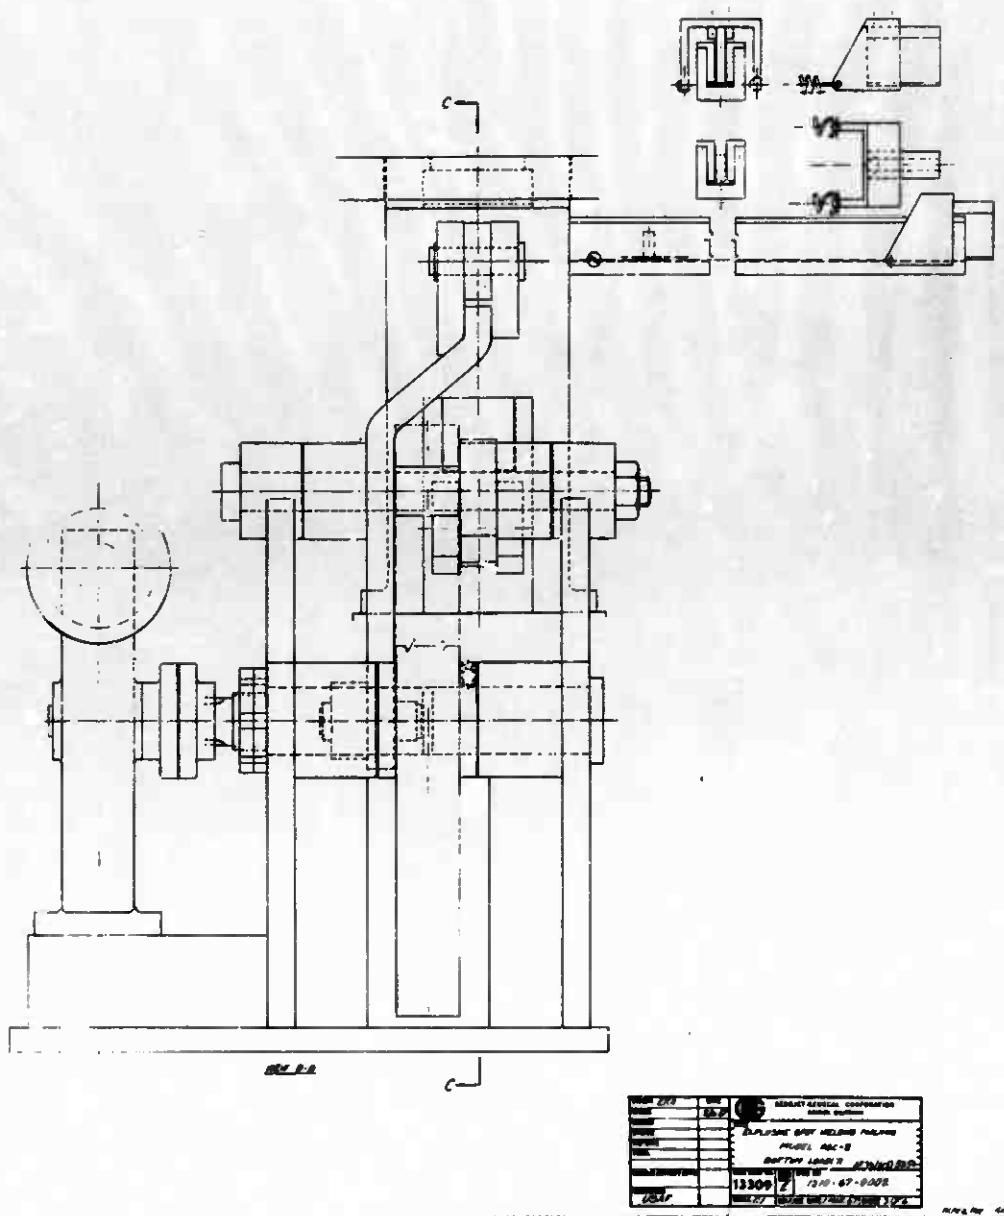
Model AGC-2 Explosive Spot Welding Machine (Sheet 3 of 4).
